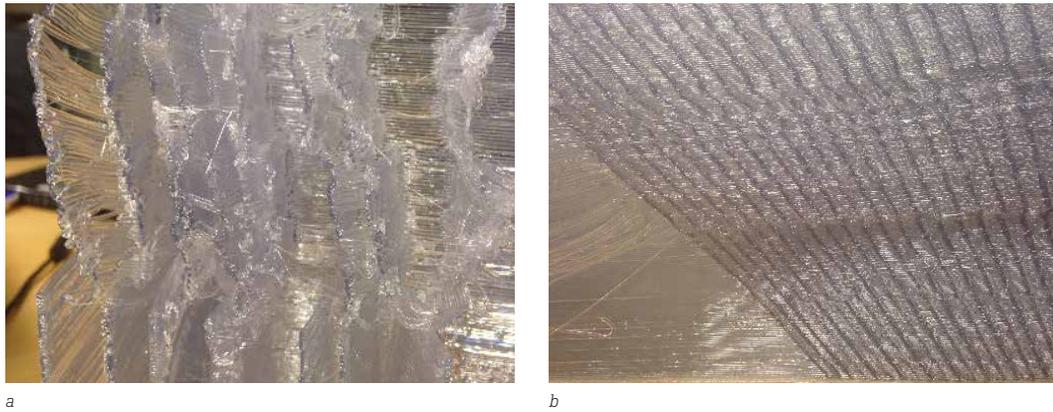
The double-curved prototype, showing the displacement of the printed layers; cross section (a) and front view (b).
